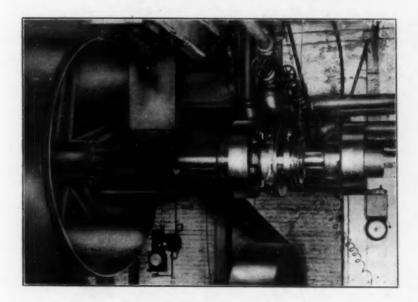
Dynamometer Placed between Flanges in Machine-Shop Drive shaft 3 in, in diameter. Spiral bunning to the wall is oil-pipe to gage
